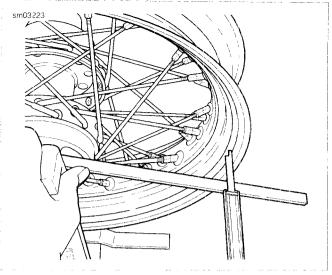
Checking Wheel Hub Offset Dimension (typical)
